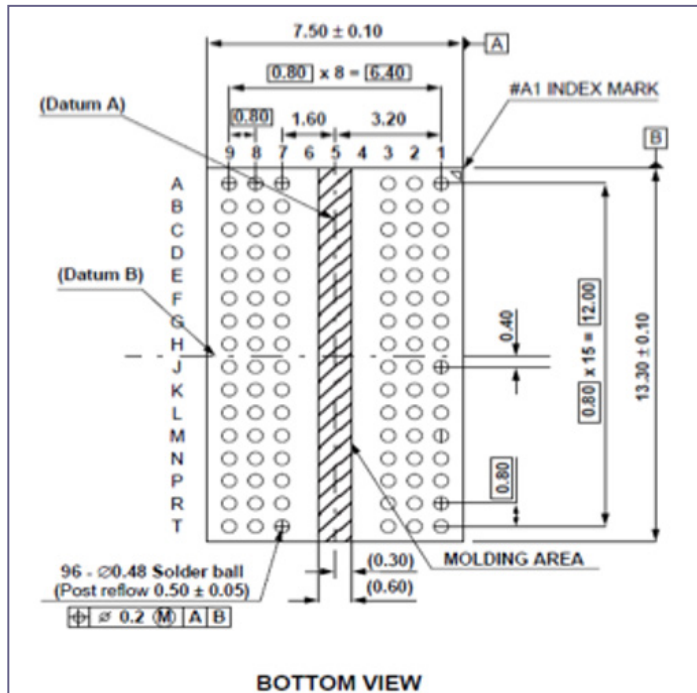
Package Footprint on Test Vehicle 1 (units in mm)
